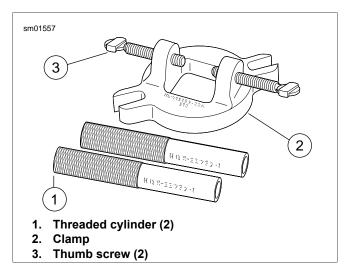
Connecting Rod Clamping Tool (Part No. HD-95952-33C)
